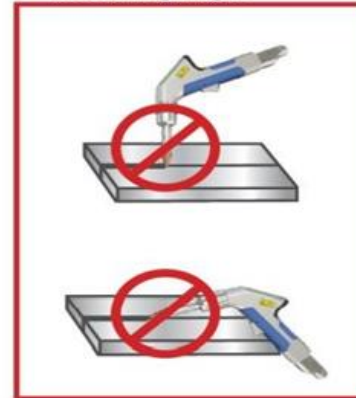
Weld Gun Angle, Reflections and Viewing Position
